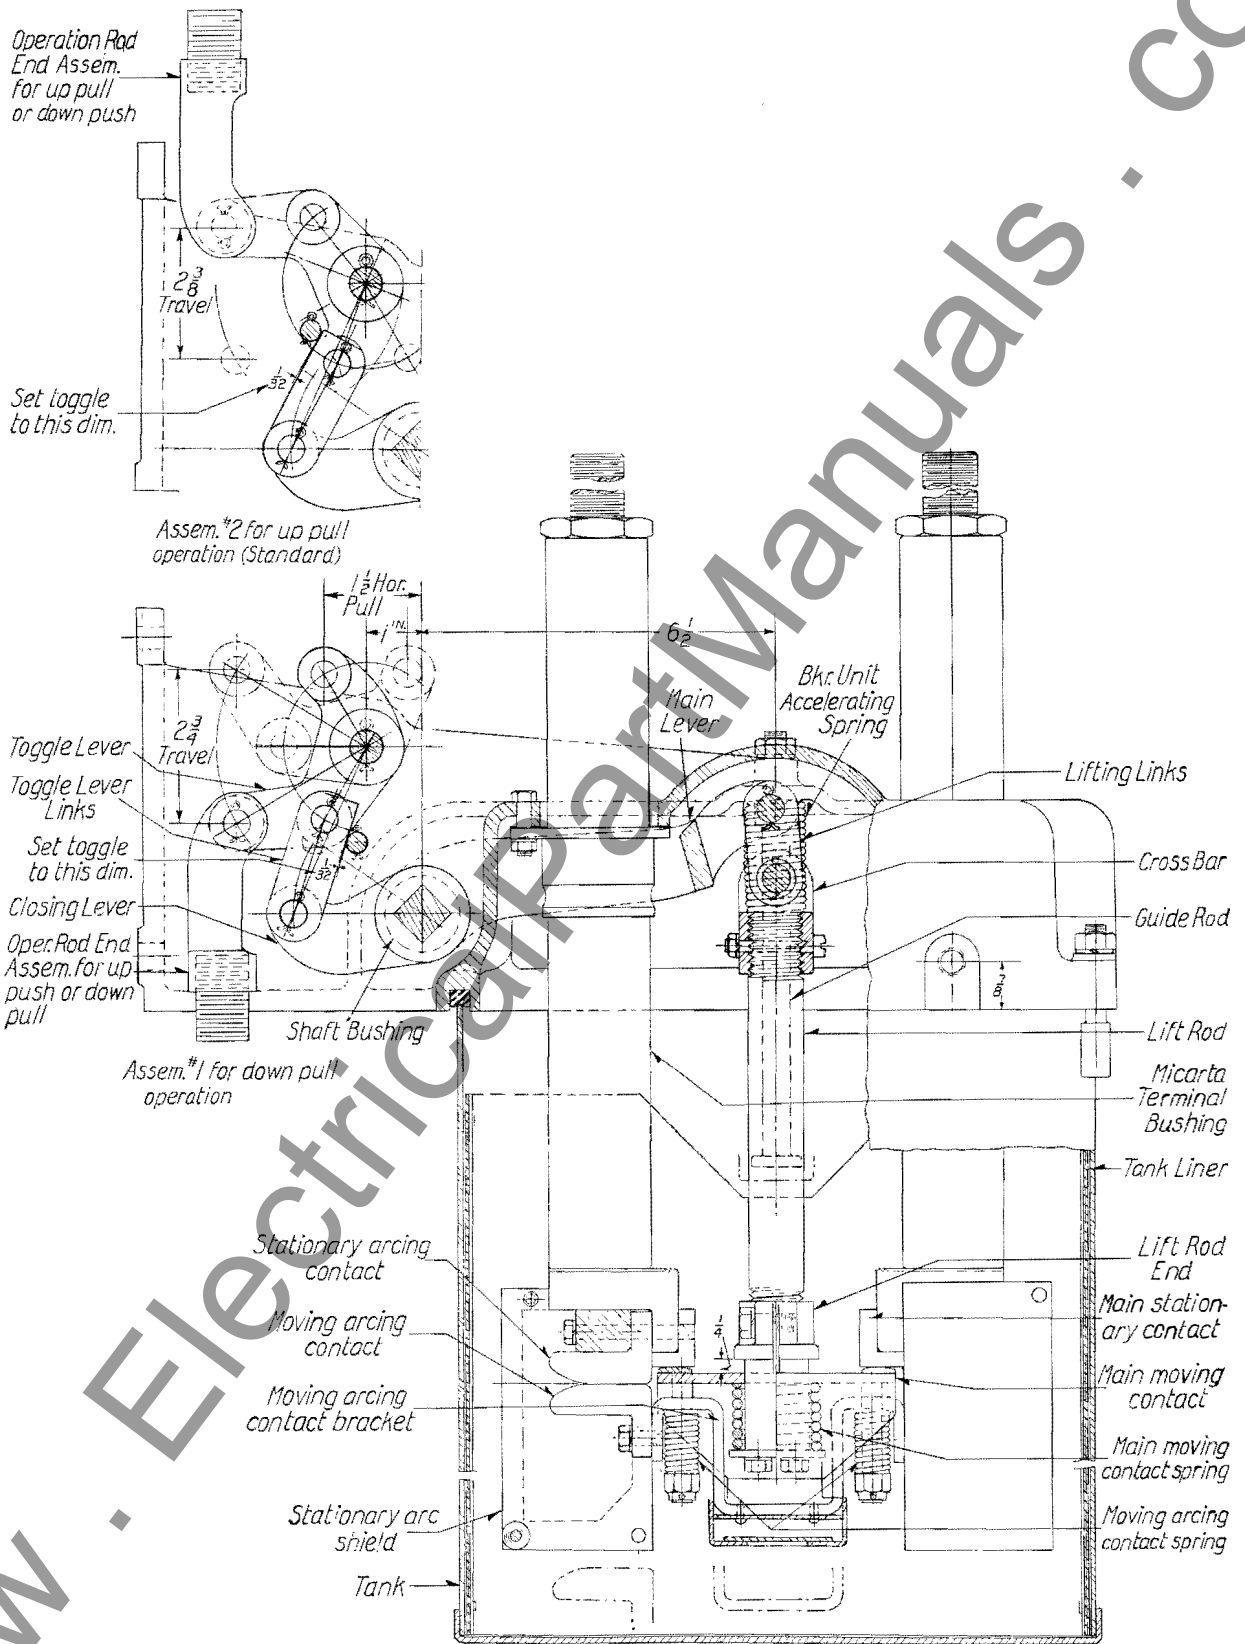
BREAKER POLE UNIT—SIDE VIEW—CROSS SECTION
